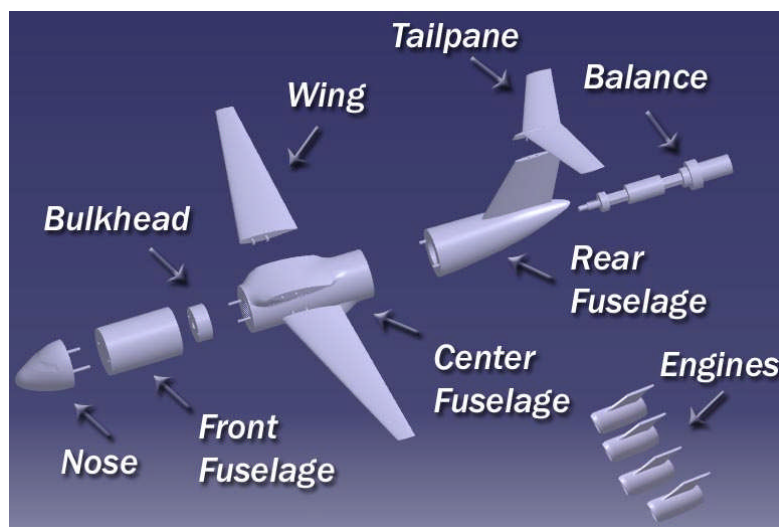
Exploded Assembly of F-02 Wind Tunnel Model (D'Ozouville, 2003)
